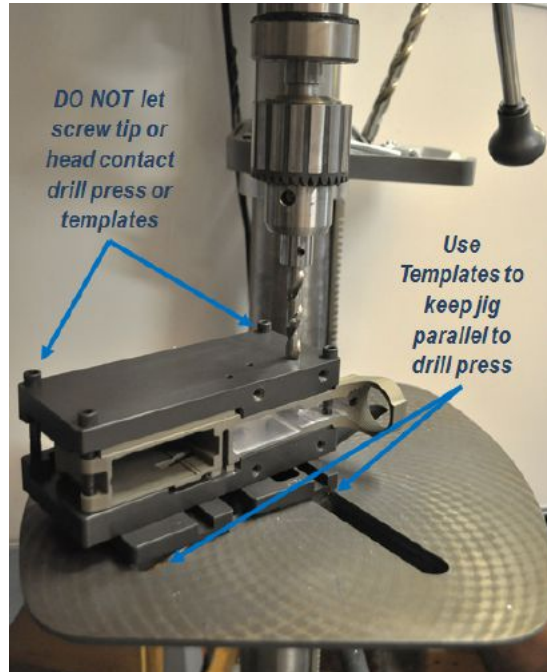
(center): Drill-press: Using the jig templates to keep screw heads and tips away from the drill press
